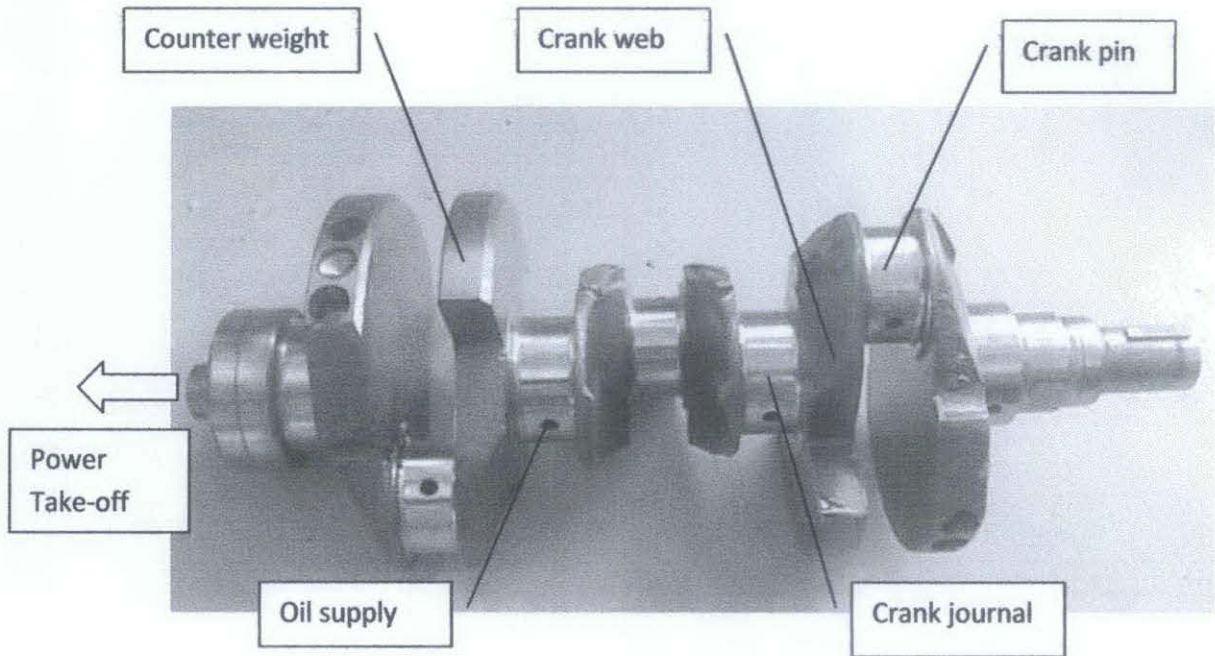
shows the crankshaft of PERODUA 1.0L engine
